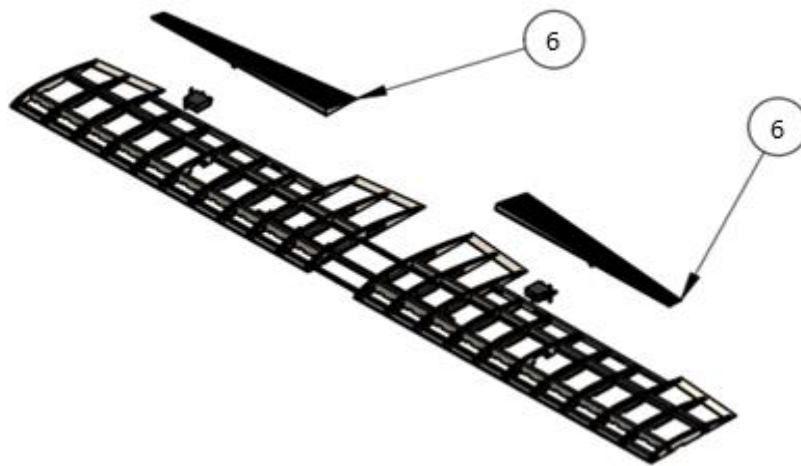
Final Wing prototype, incorporating previously discussed elements, 6) Ailerons
